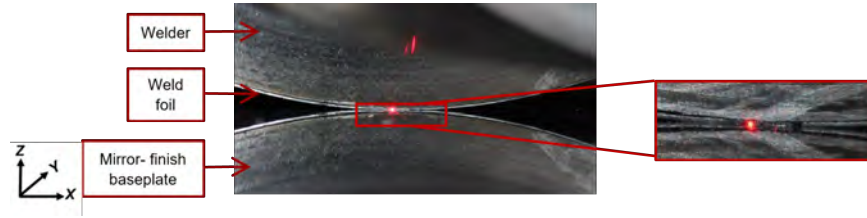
Focused image of welder and foil before welding taken with a macro lens and lighting system. The welder is applying the set weld normal force on the baseplate. The baseplate is machine flat and hence has a mirroring effect in the image. The zoomed image shows the laser spot completely positioned within the foil.
